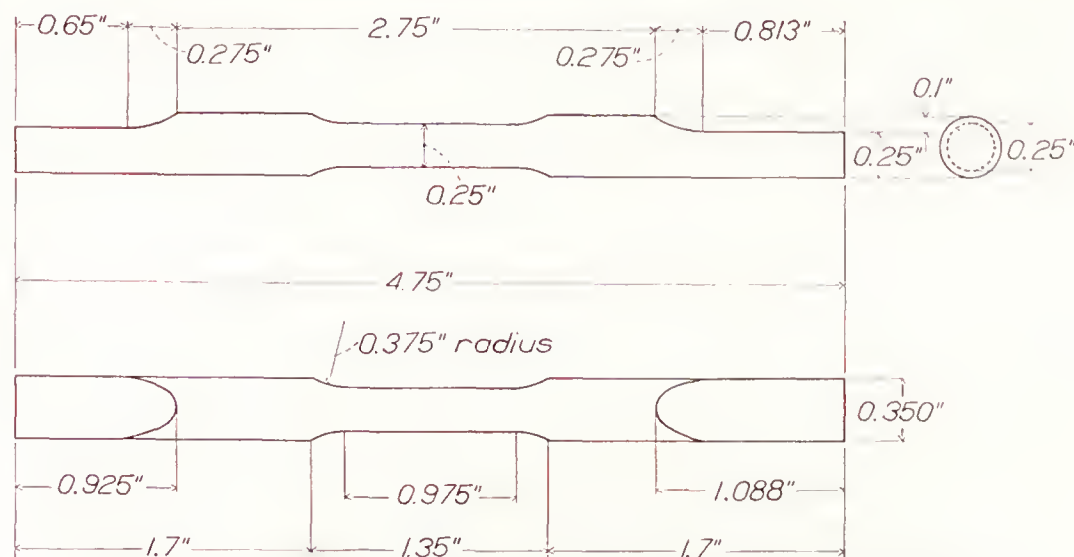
Torsion impact test specimen machined from Haigh fatigue specimens.
